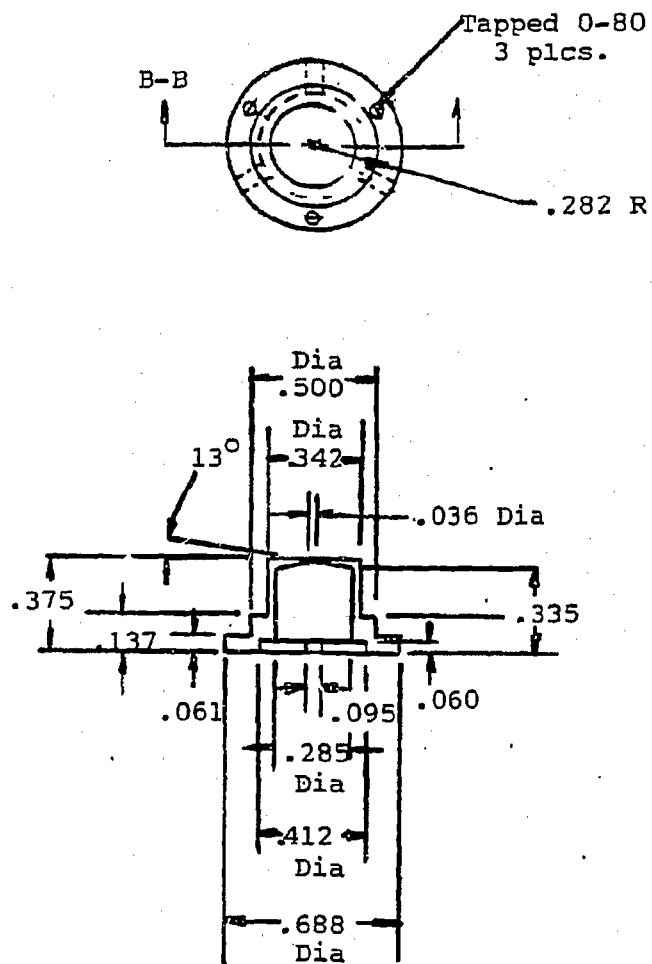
Electron filament holder. The filament assembly fits up in the holder such that the end of the filament is lined up with the 0.036 hole at the top and is ~ 0.010-0.002 in. from touching the sides of the hole. The filament holder assembly plate holds the filament in place and is wired to V1 on Fig. A.1. The plate is held away from the electron gun plate (Fig. A.26) by 3 ceramic posts (see Fig. A.37).
